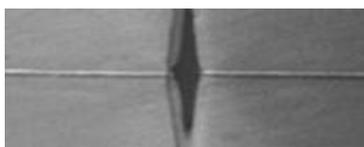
Laser welded TRIP joint specimen after tensile test
